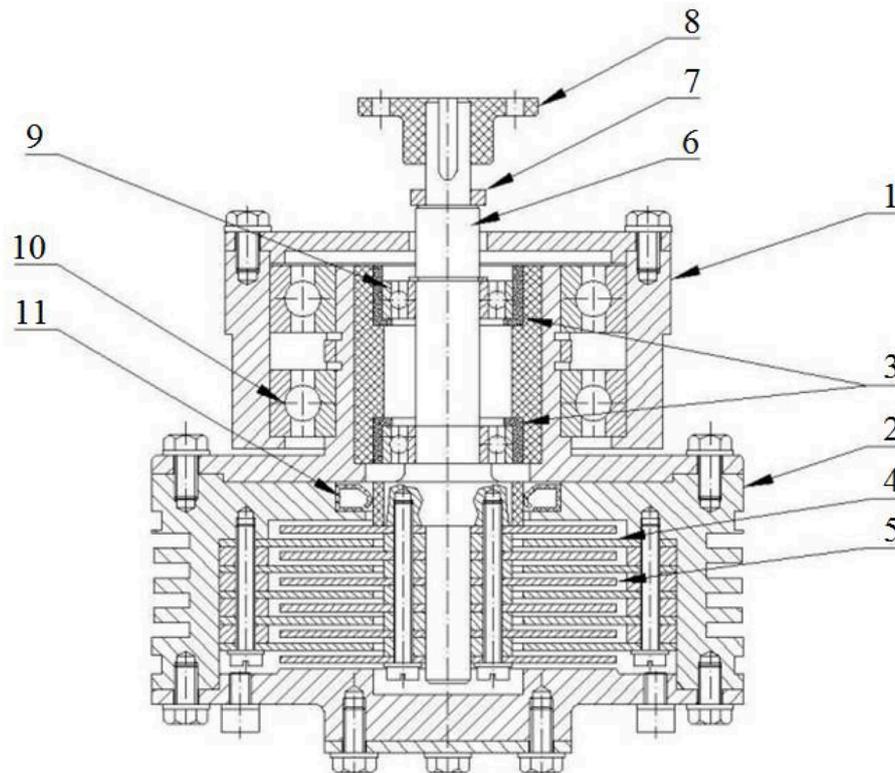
| Design solution of a prototype of the clutch: 1, bearings casing; 2, clutch casing; 3, insulating sleeves for shaft bearings; 4, discs fixed to the casing; 5, discs placed on the shaft; 6, shaft; 7, sliding ring; 8, flexible coupling; 9, shaft's bearing; 10, clutch's bearing; 11, sealing ring.
